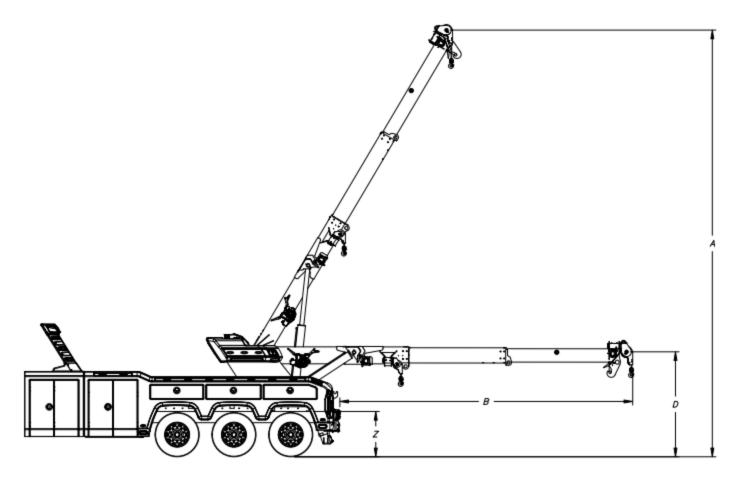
BOOM AND JACK LEGS DIMENSIONS - SIDE VIEW (EXAMPLE)
